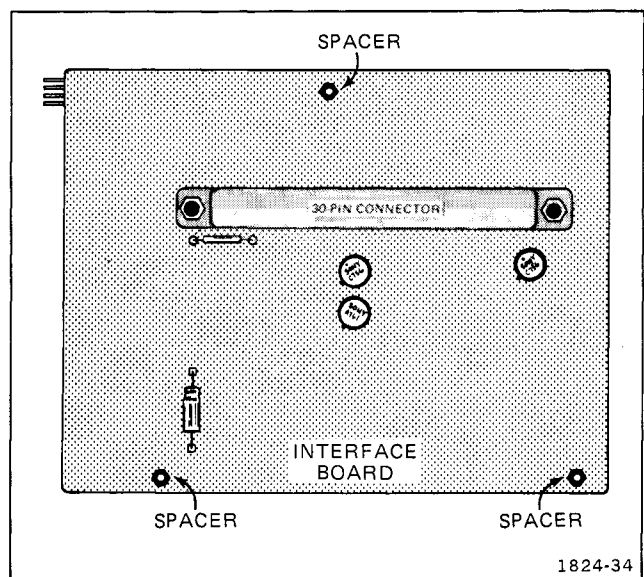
Location of hexagonal spacers on Interface circuit board.
